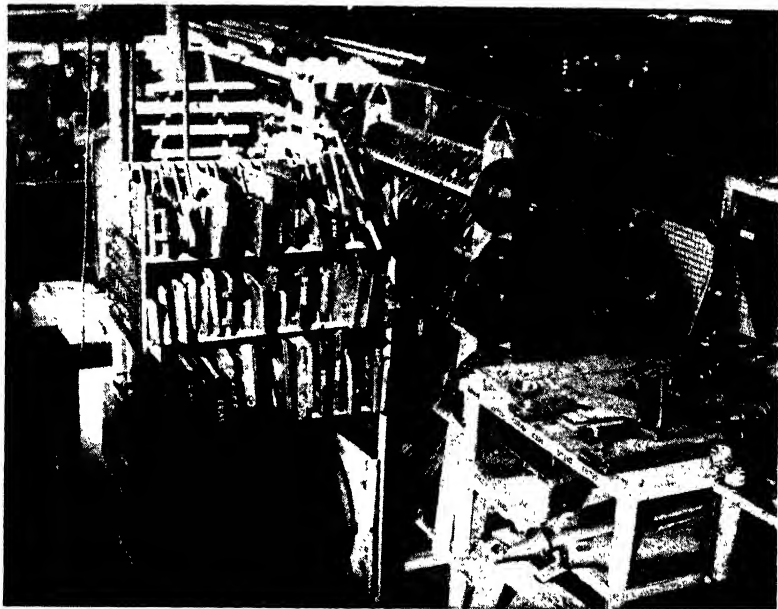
The jig and tool room foreman and clerk could best see the need for these jig and tool racks. They visualized and sketched the design, and the racks were fabricated by arc welding from available materials. (Courtesy of R. G. LeTourneau, Inc.)
